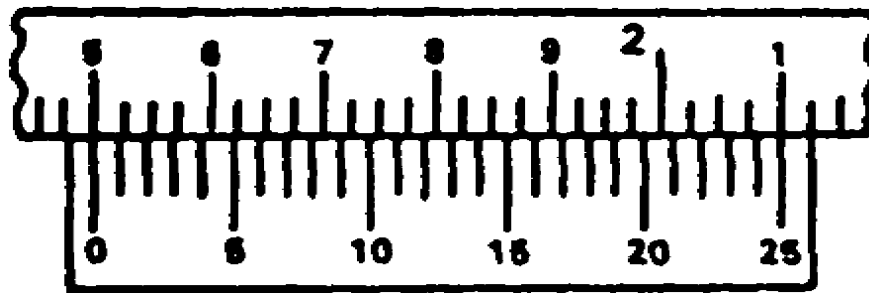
ENGLISH VERNIER CALIPER SCALE
